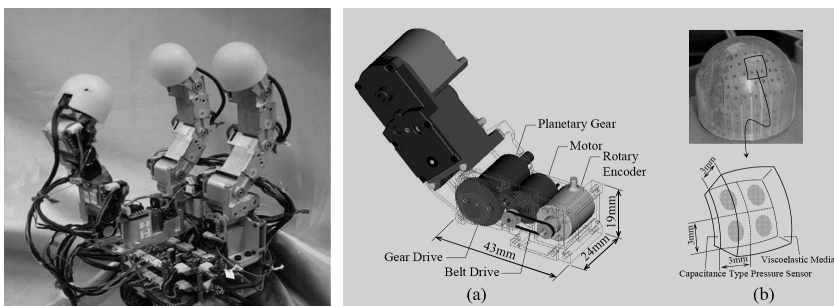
(a) Joint Drive Unit (b) Tactile sensor, [18]
